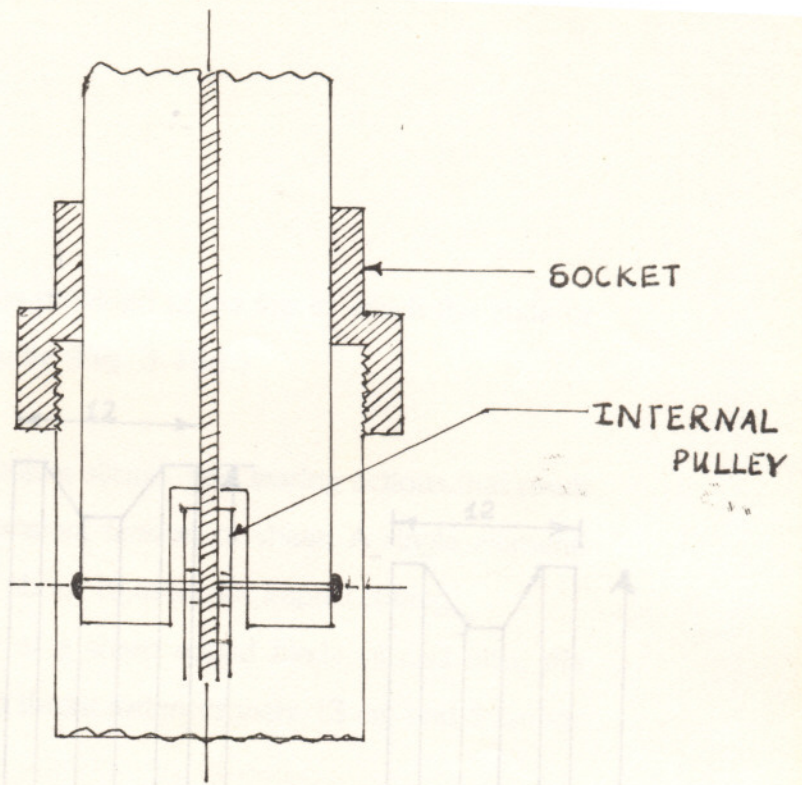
(a) SECTIONAL VIEW OF THE PIPE JOINT
